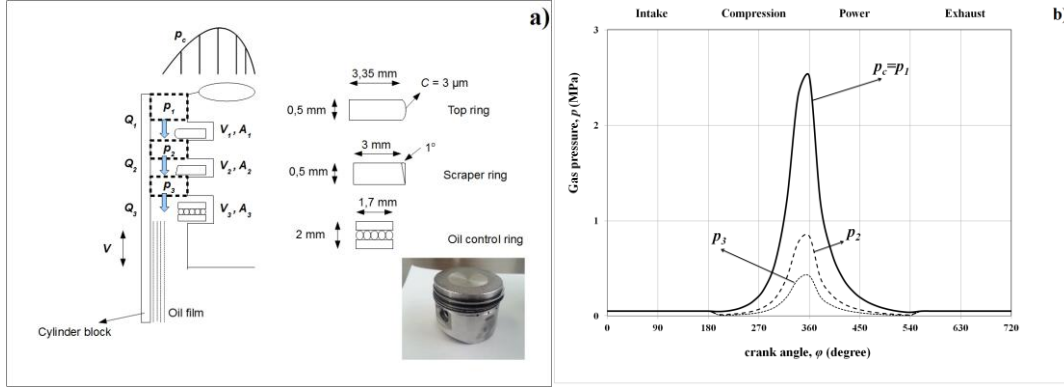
(a) Piston assembly geometry of four stroke motor engine, (b) the variation of gas pressures
